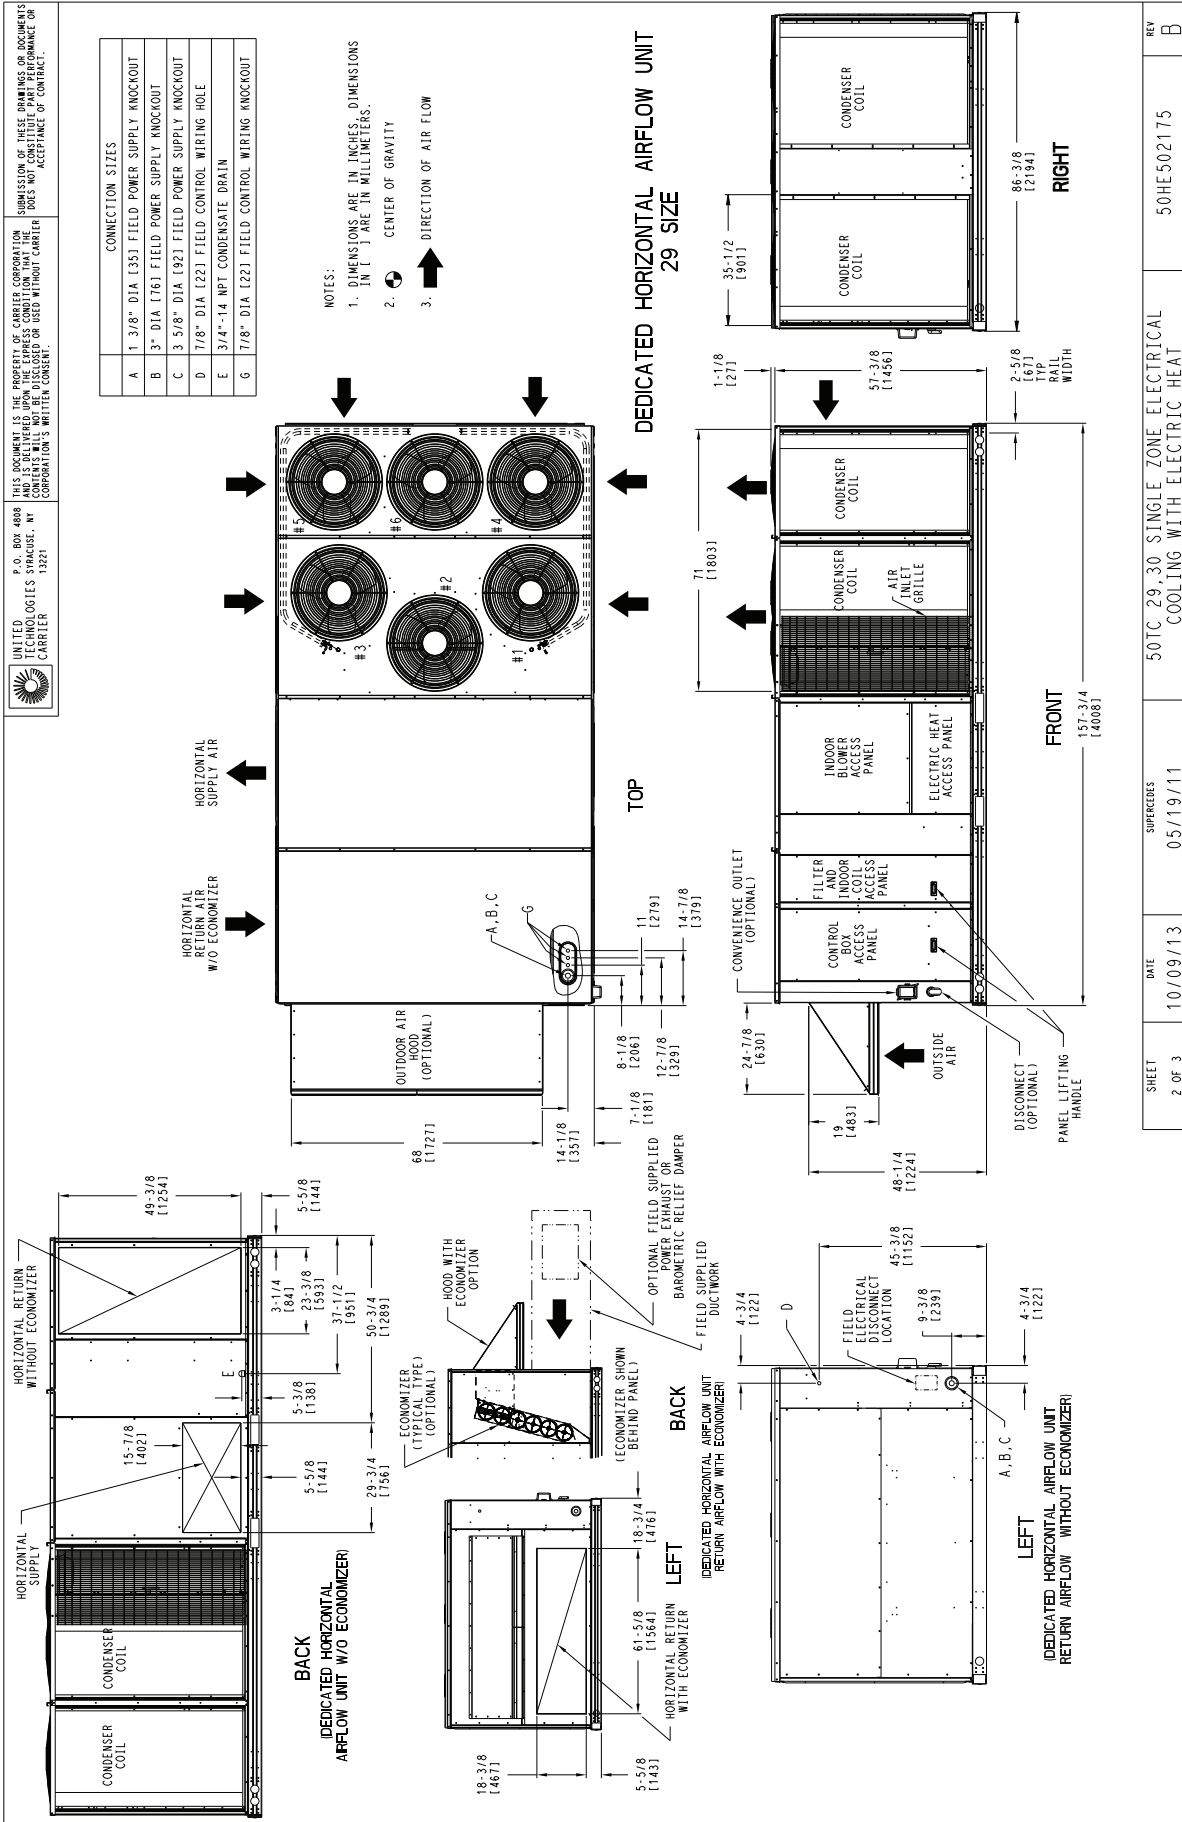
Unit Dimensional Drawing – 29 Size Unit
